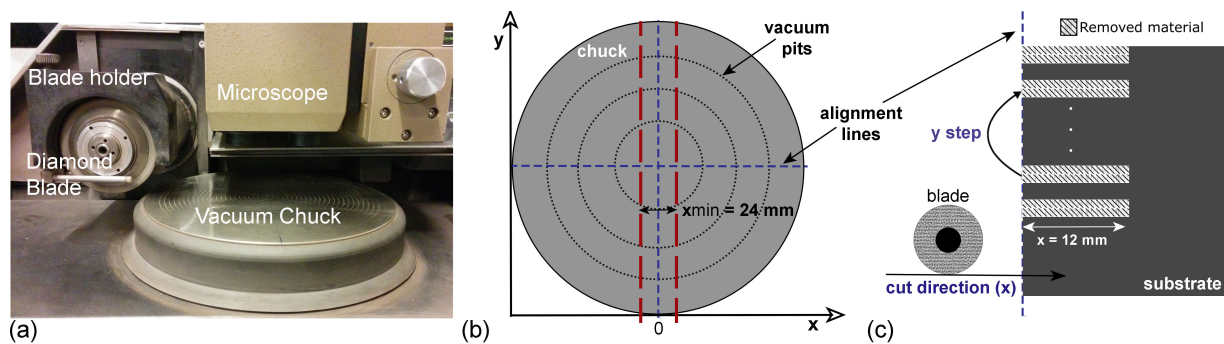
(a) Blade dicing setup photography. (b) Schematic of dicing cut process in the chuck, and (c) Top view detailed plan of the dicing process for producing long planar probes.
